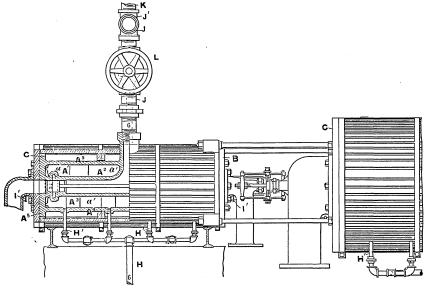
Sectional Elevation High Pressure Cylinder.
